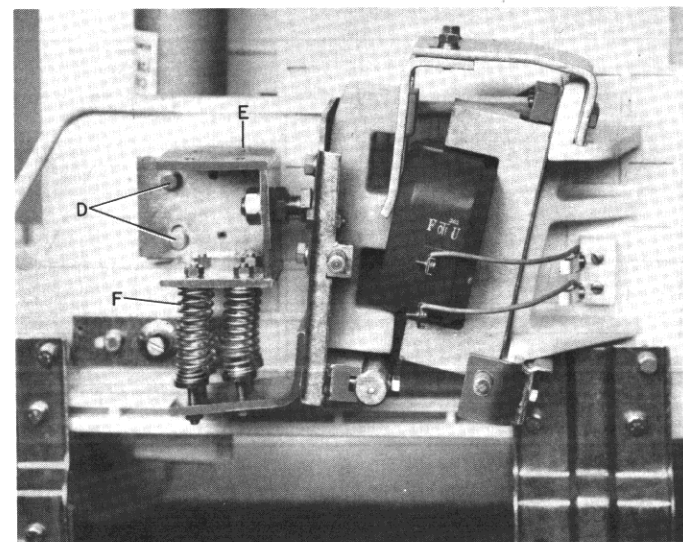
Coil replacement Step 3 — removal of armature stop — mounting bolts, stop bracket, and return springs
